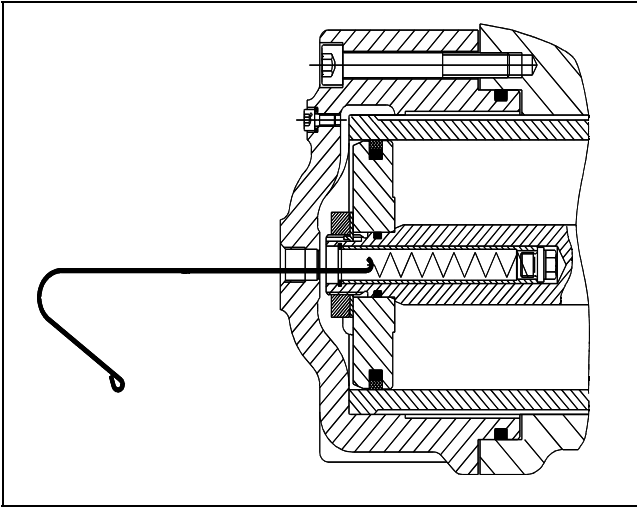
Removing the inner tension spring (119) by means of the assembly hook T10 to attach the position sensor rod (125)
